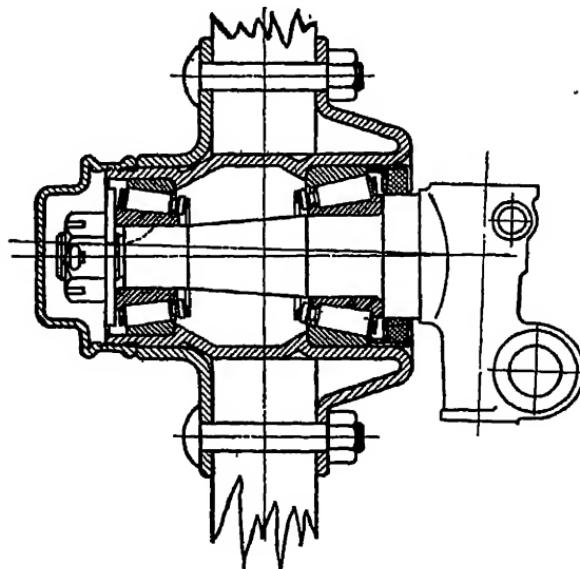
APPLICATION OF TAPERED ROLLER BEARING TO
